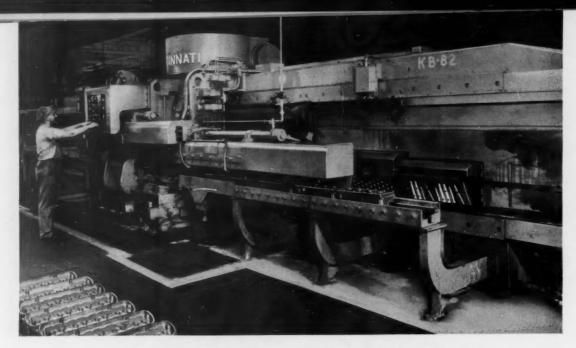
Two-way, horizontal broaching machine with mechanical drive for cutting exhaust, intake, and joint faces of cast-iron cylinder heads. Stock removal is 3/16 inch.
